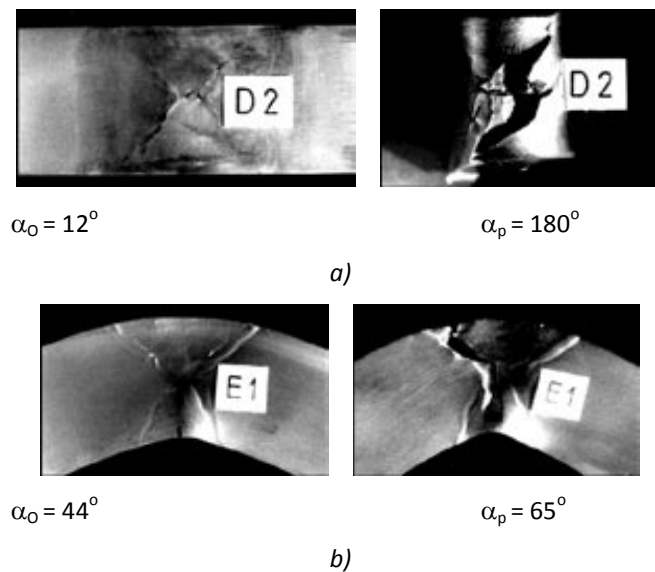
The appearance of heterogeneous under-matched weld joint during side a) and cap b) specimen bending
